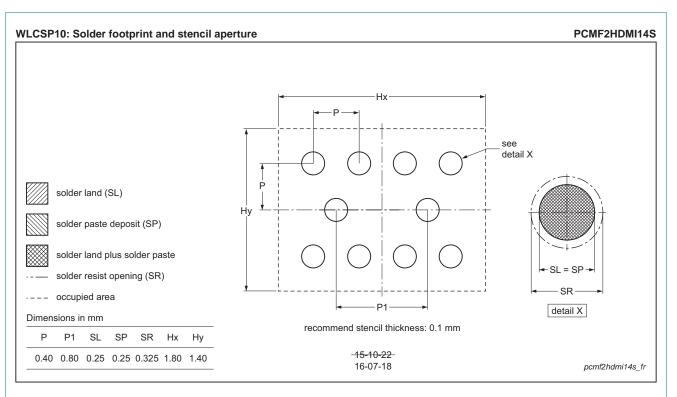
Soldering footprint WLCSP10 (PCMF2HDMI14S)
